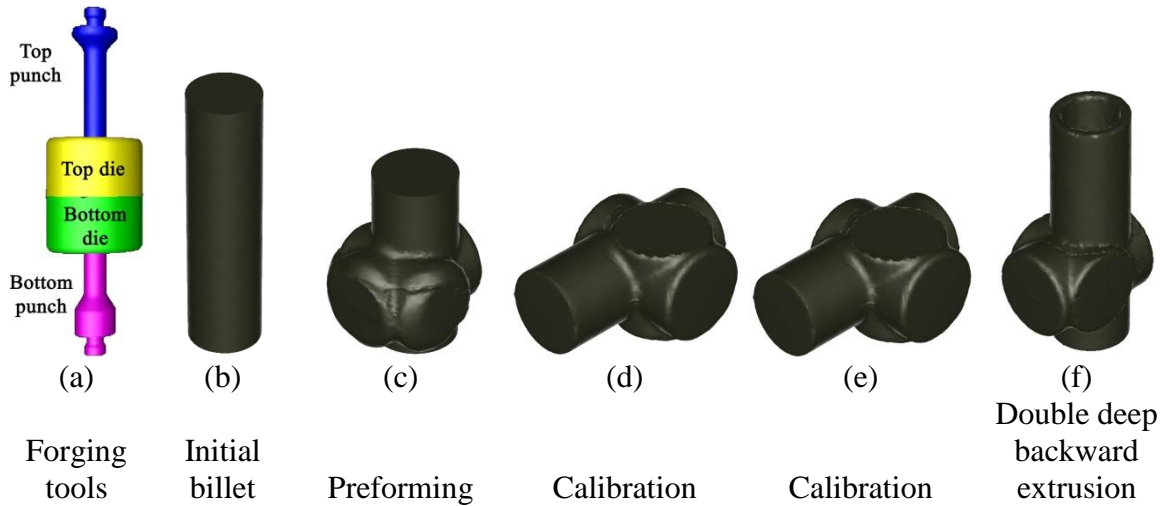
a) Forging tools used and b-c-d-e-f) sequence of the four-stage cold forging process of heating pipe fitting
